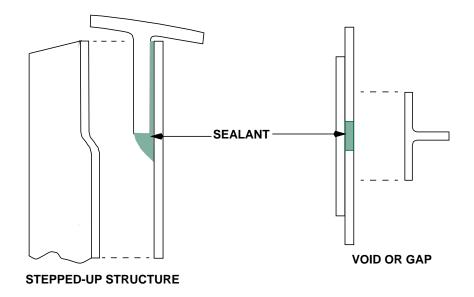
WET ASSEMBLY OF STEPPED-UP STRUCTURES AND VOIDS
